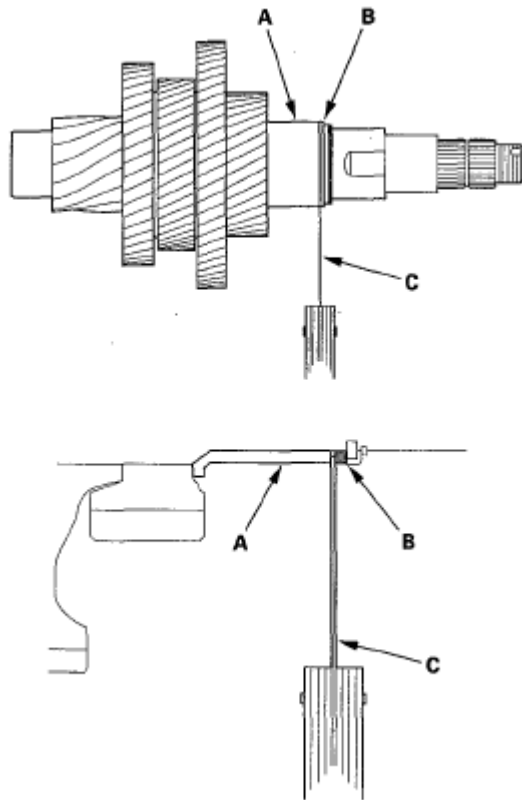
Identifying Clearance Between Collar And Washer With Feeler Gauge
